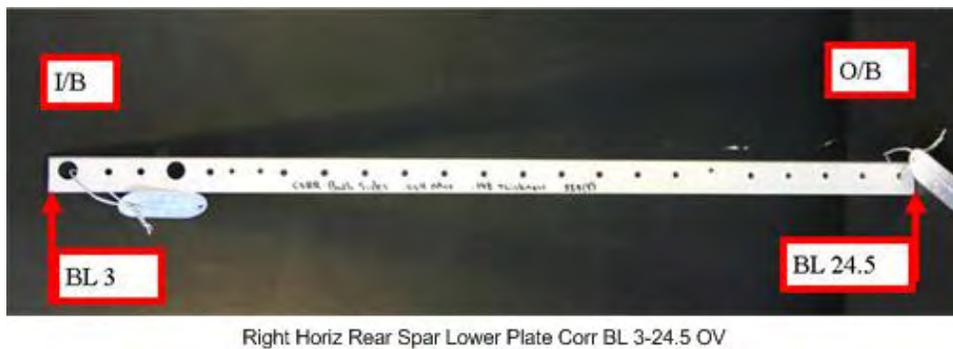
Location of Light Corrosion on the Right Horizontal Stabilizer Rear Spar Lower Plate BL 3 Through BL 24.5
